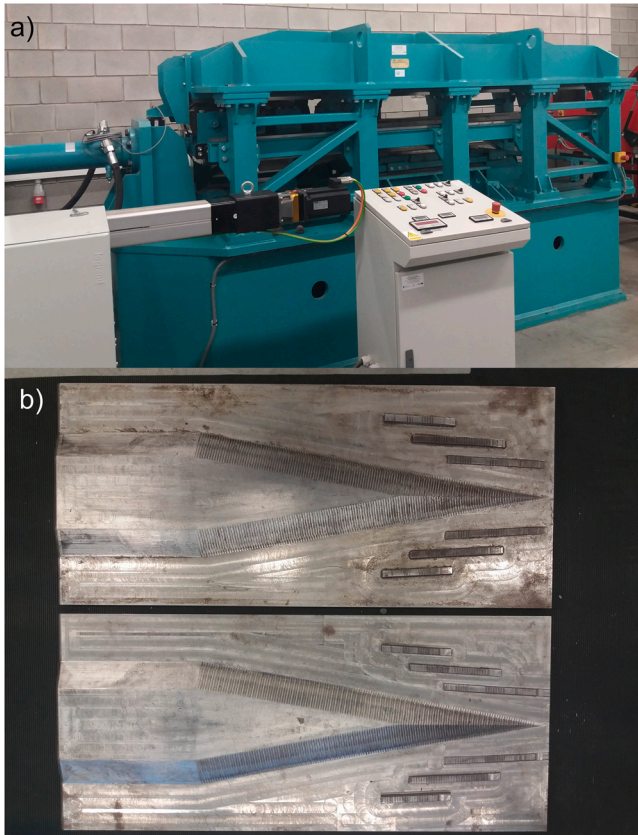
Equipment used in the experiments: a) flat tool rolling mill, b) wedge tools.
